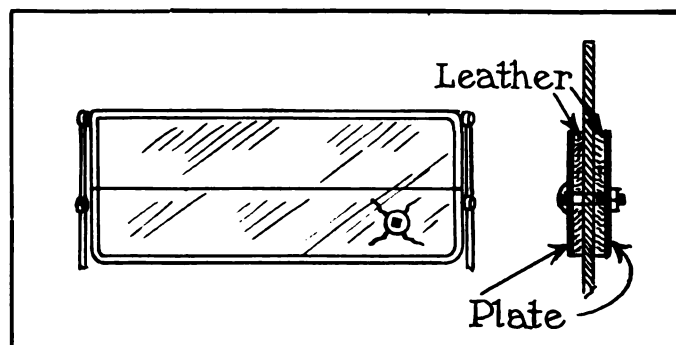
Method of Repairing Cracked Windshield by Bolting Pads Against Edges of Hole.
